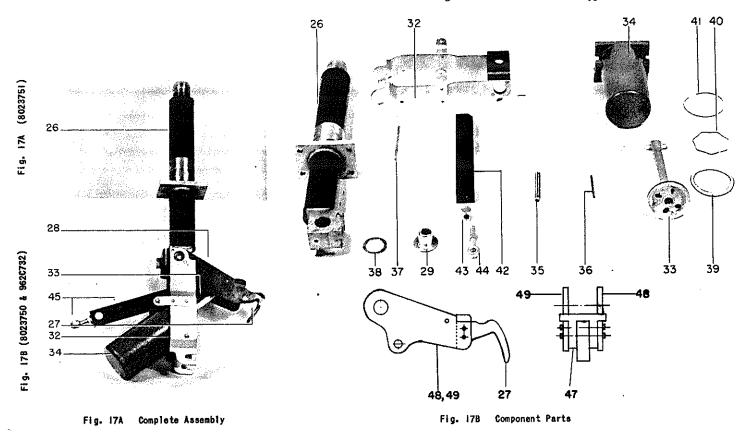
Front Bushing Assembly (Ref. No. 25)
